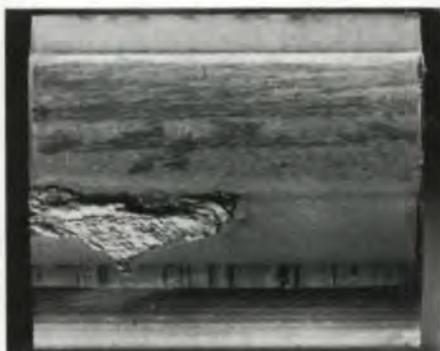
Flank damage on a pinion. WEA at the surface in the area of initial pitting ( $P_c = 1600 \text{ N/mm}^2$ ).
